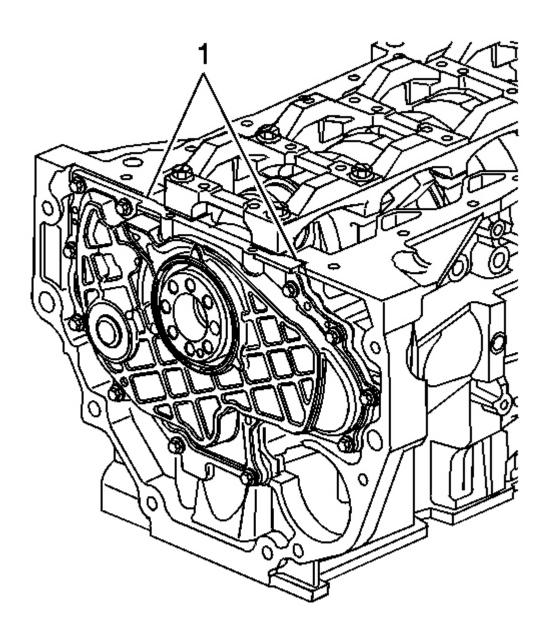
View Of Bottom Of Oil Pan Sealing Area Courtesy of GENERAL MOTORS CORP.
